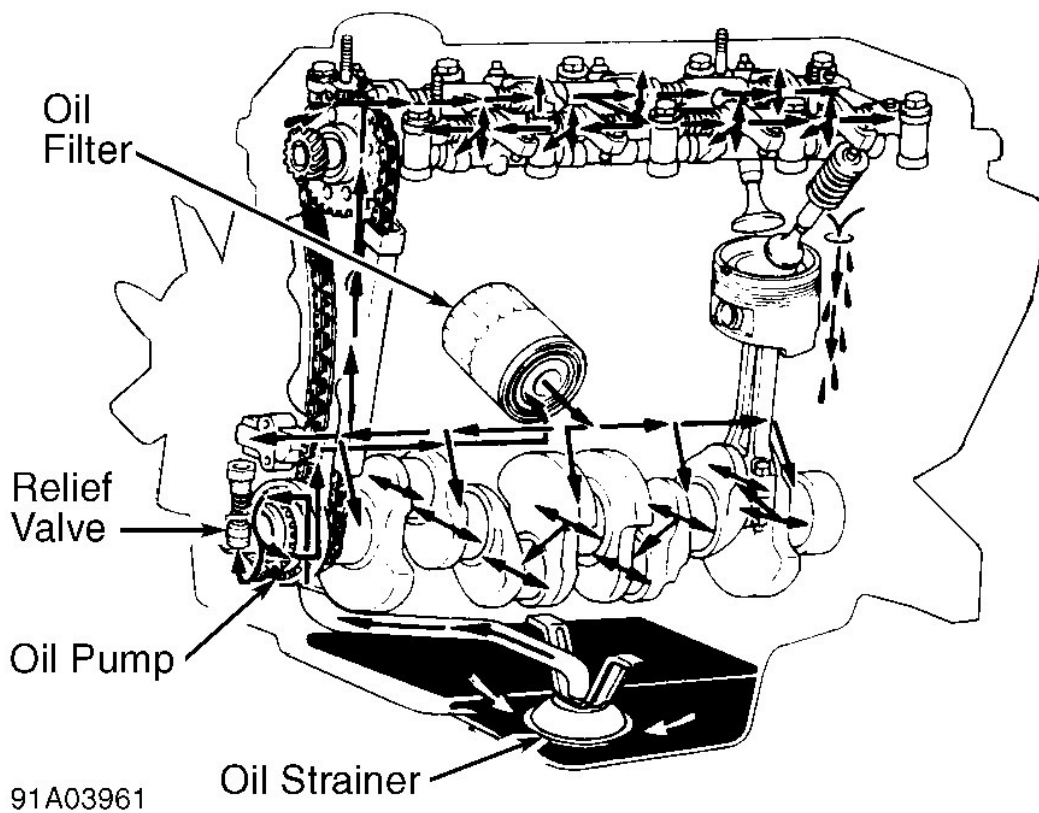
Cross-Sectional View Of Engine Oil Circuit
